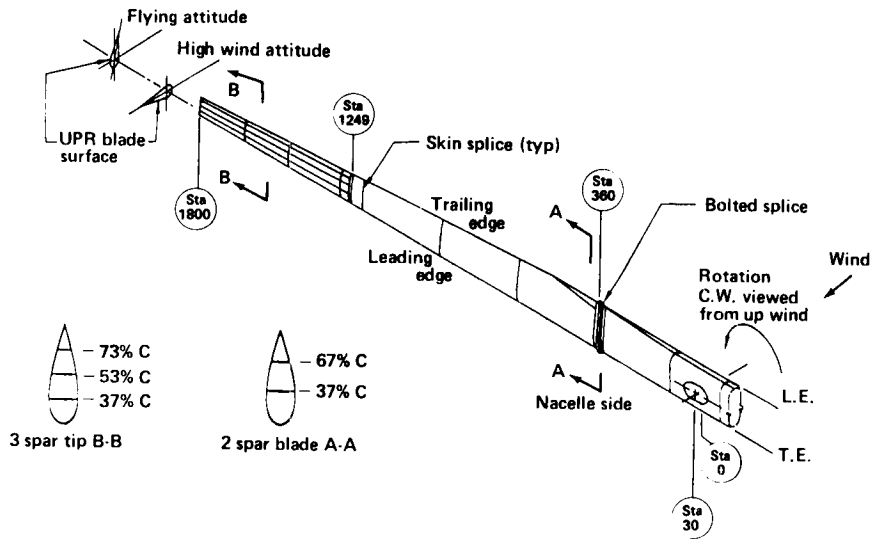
Steel Rotor Blade Configuration MOD-2-107
